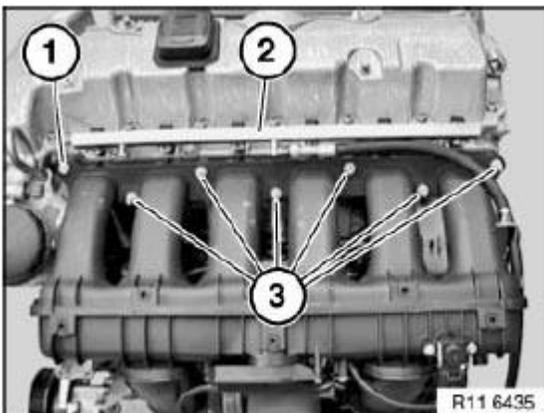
Identifying Fuel Rail With Screw And Nuts
